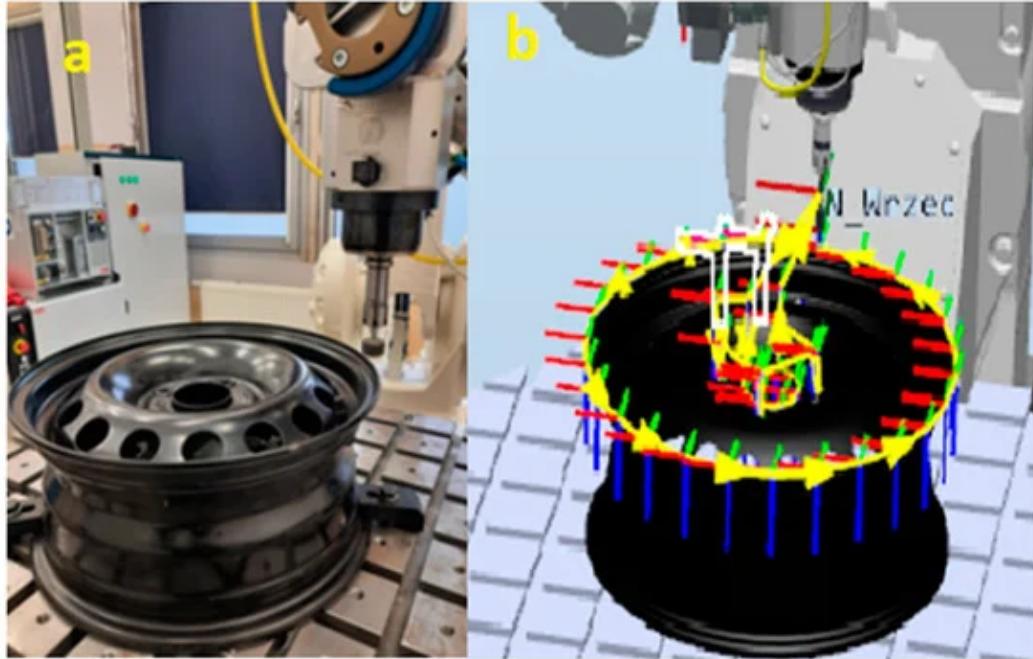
VR replica as a digital twin marking the machining route of the physical machining part and its tool [32].
